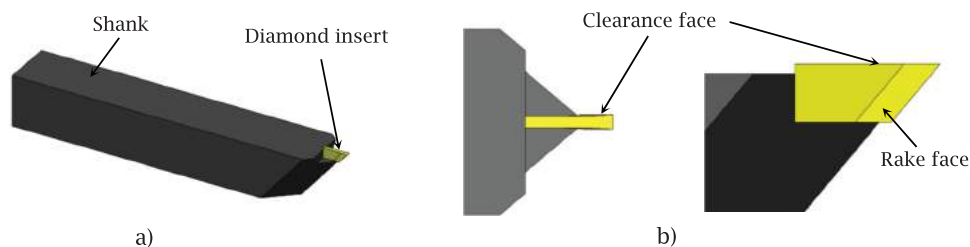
Design of the diamond cutting tool: a) overview of the cutting tool, and b) constructive detail of the tool tip.
